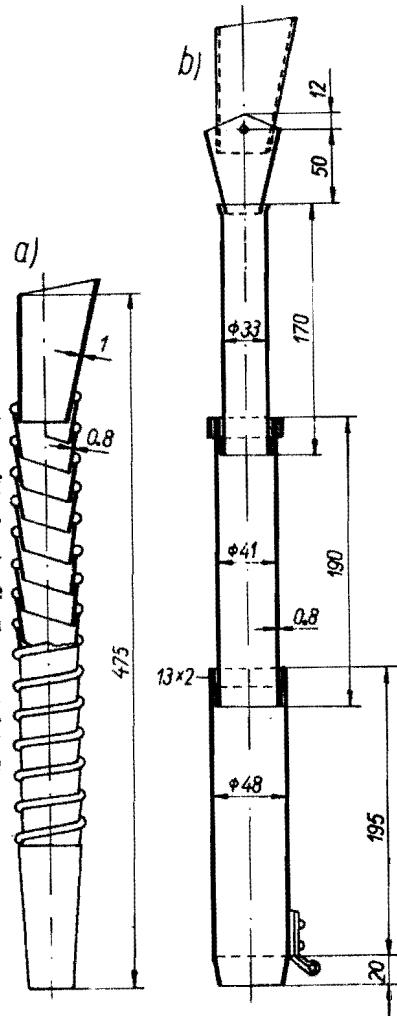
Example of drill seed tubes: a) spiral; b) telescopic. (After Kühne).
